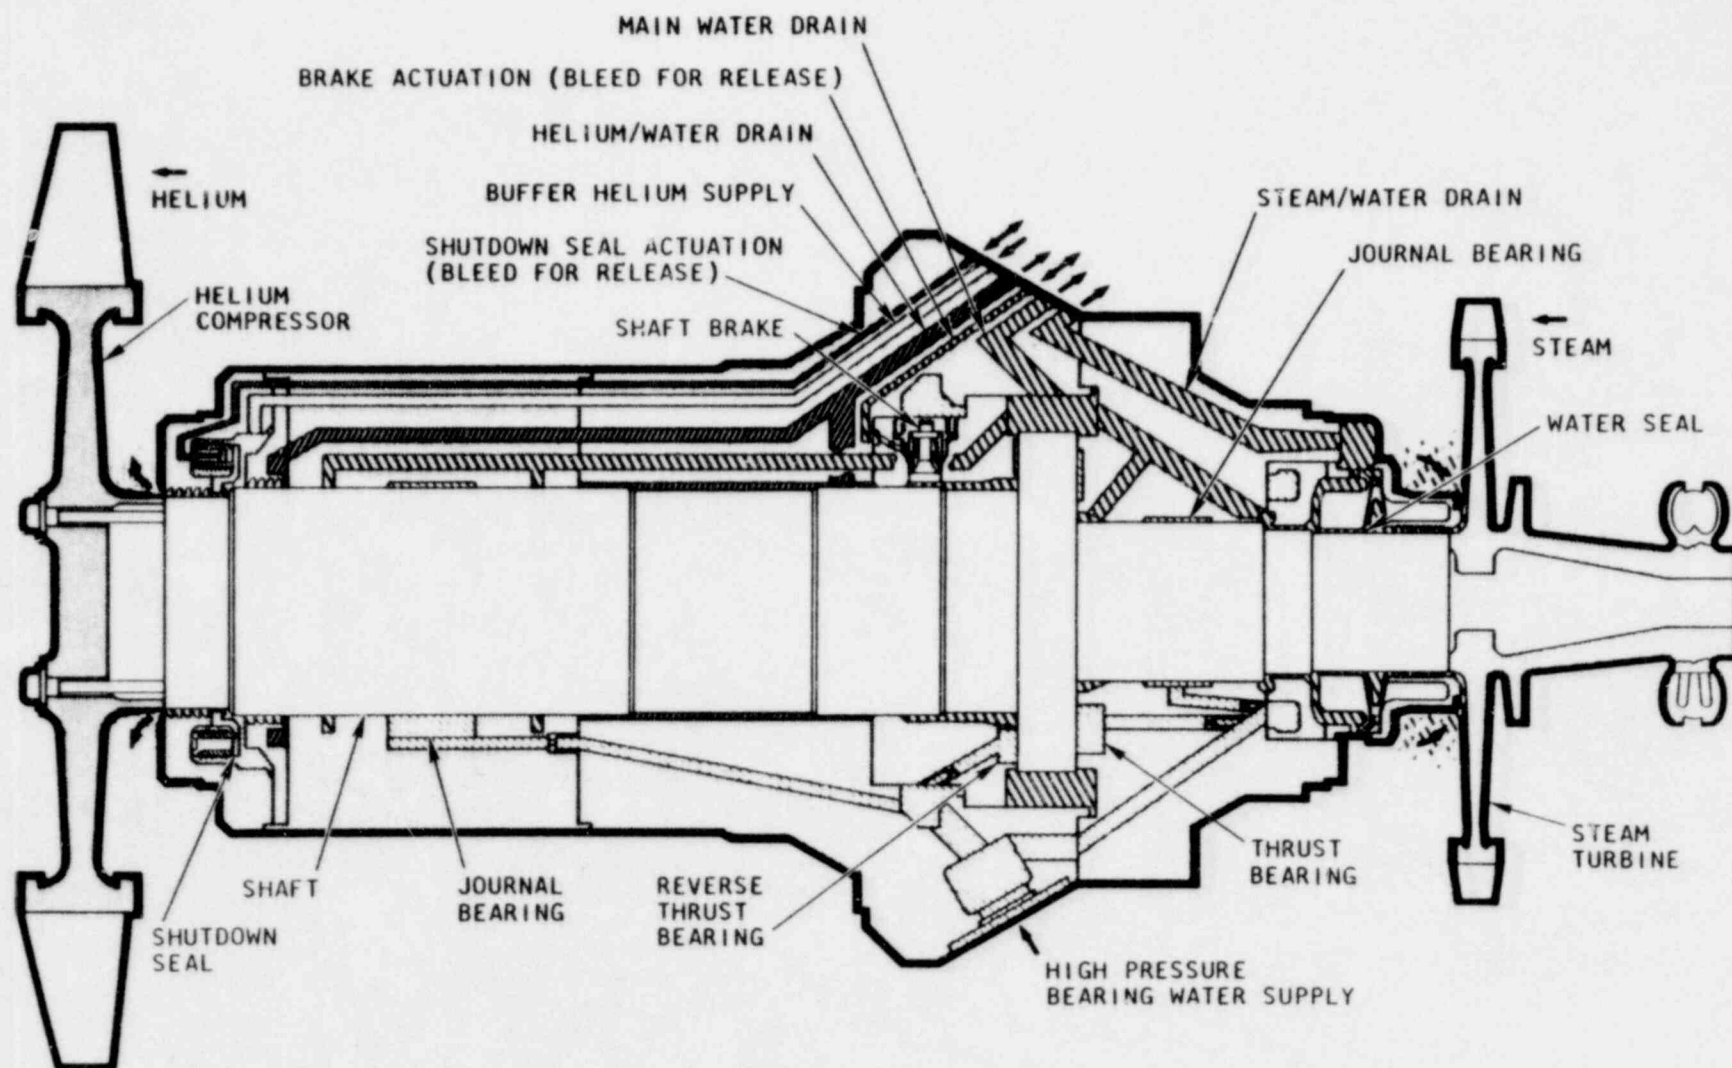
Helium Circulator Bearing and Seal Flow Arrangement
